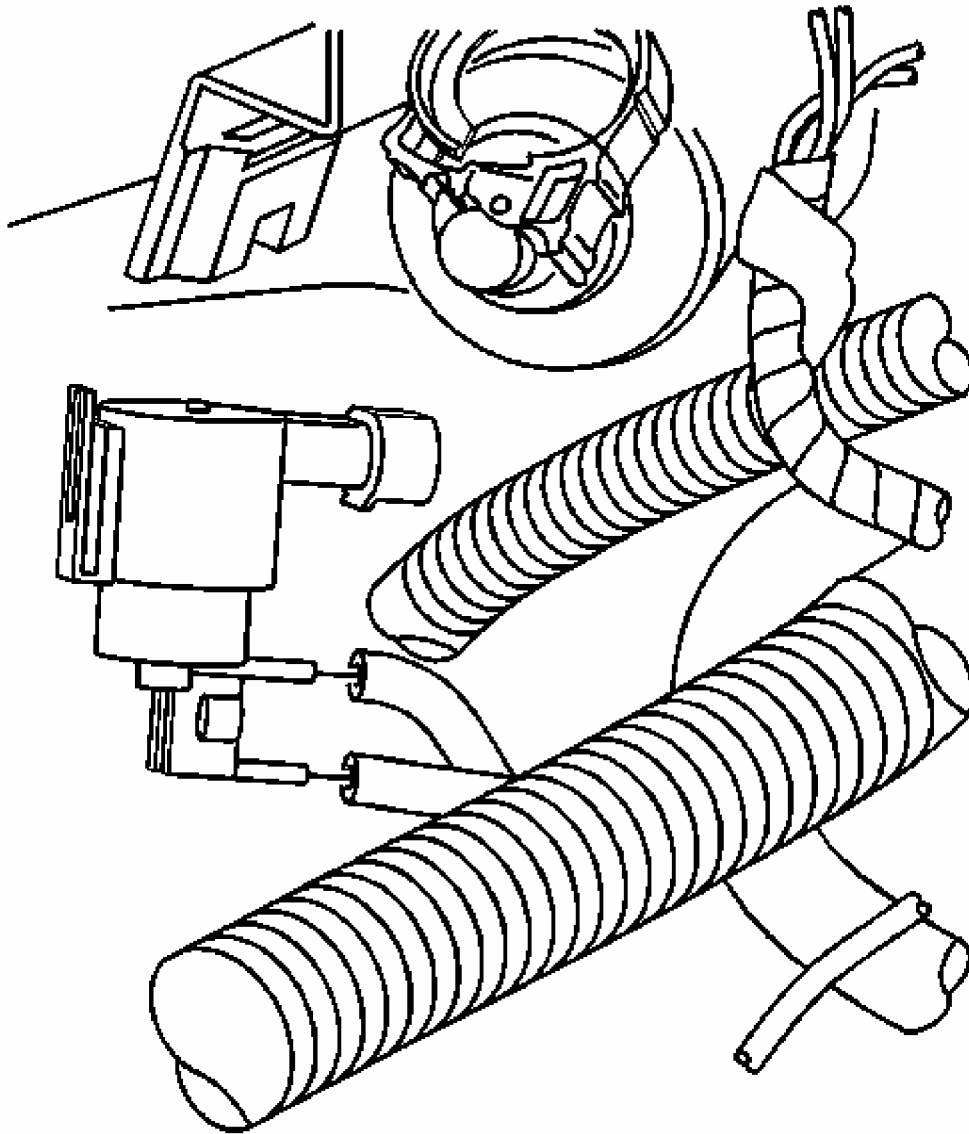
Locating Vacuum Hoses At Vacuum Solenoid Valve
